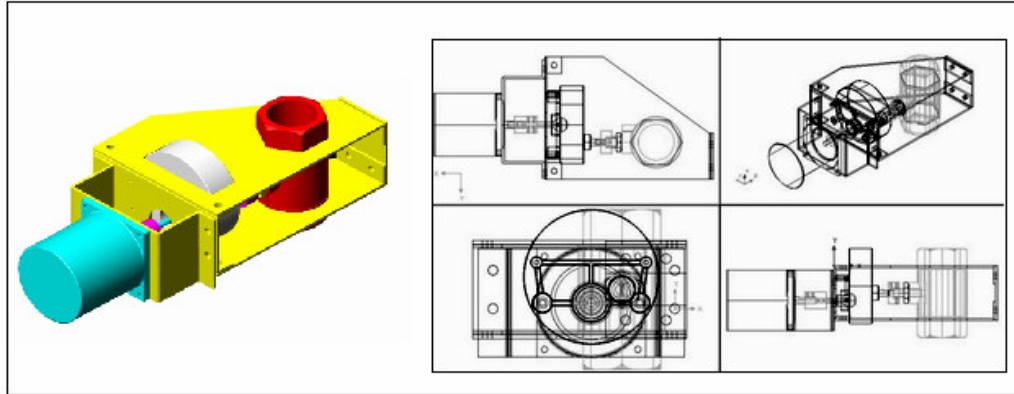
Assembly of Servo Motor, Gearbox and Ball Valve
